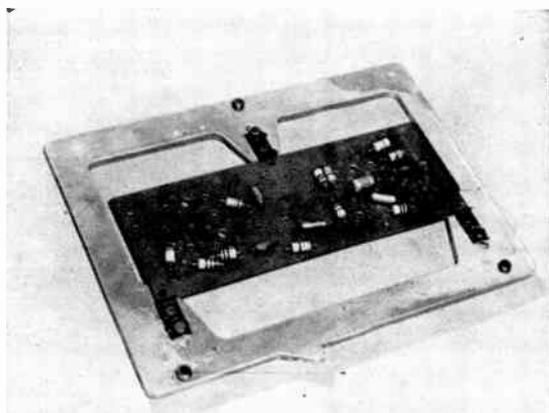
Conveyor Pallet, complete with printed wiring board and assembled components.
